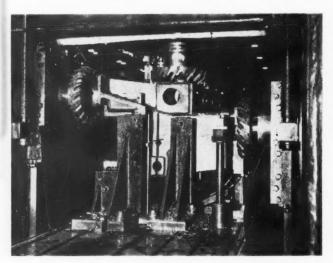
The top, side and bottom surfaces of the engine frame are machined in this Ingersoll planer-type milling machine.
